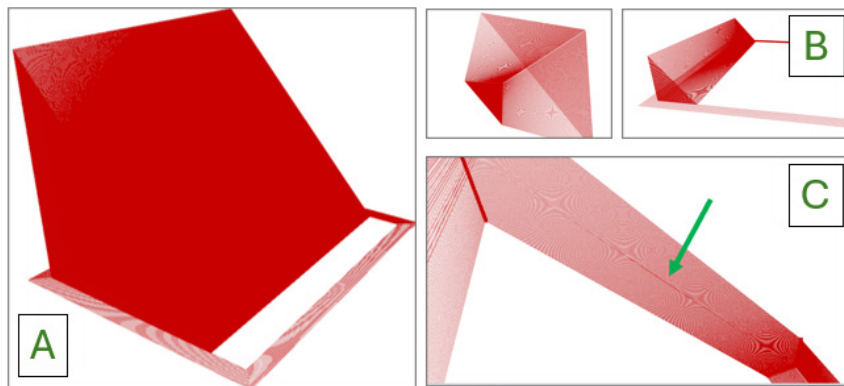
Large size parts G-code checking: (A) Incomprehensible preview of G-code, (B) Partial view of G-code, (C) Determination of the error.
